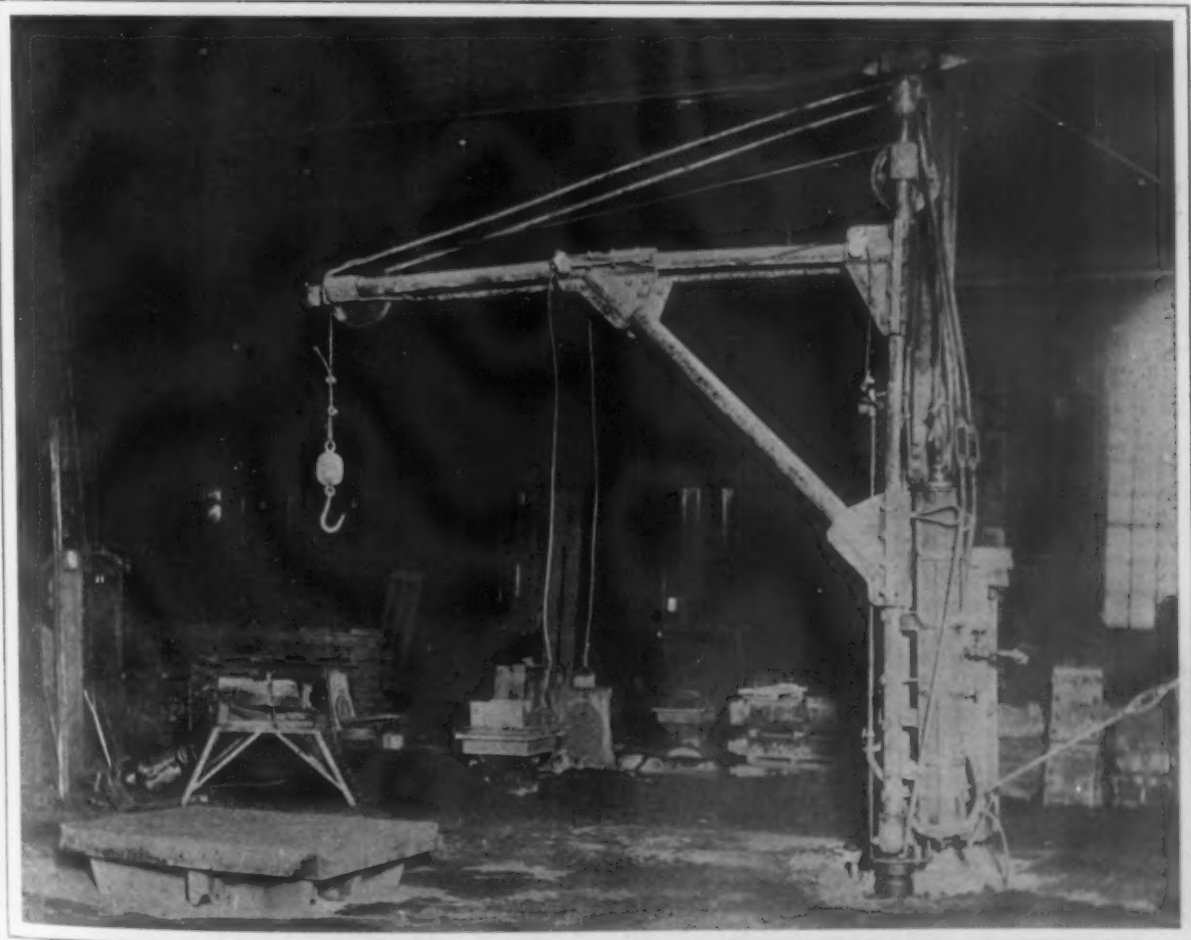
Two Ton Air Jib Cranes Arranged to Serve an 18-In. Air Jolt Molding Machine
